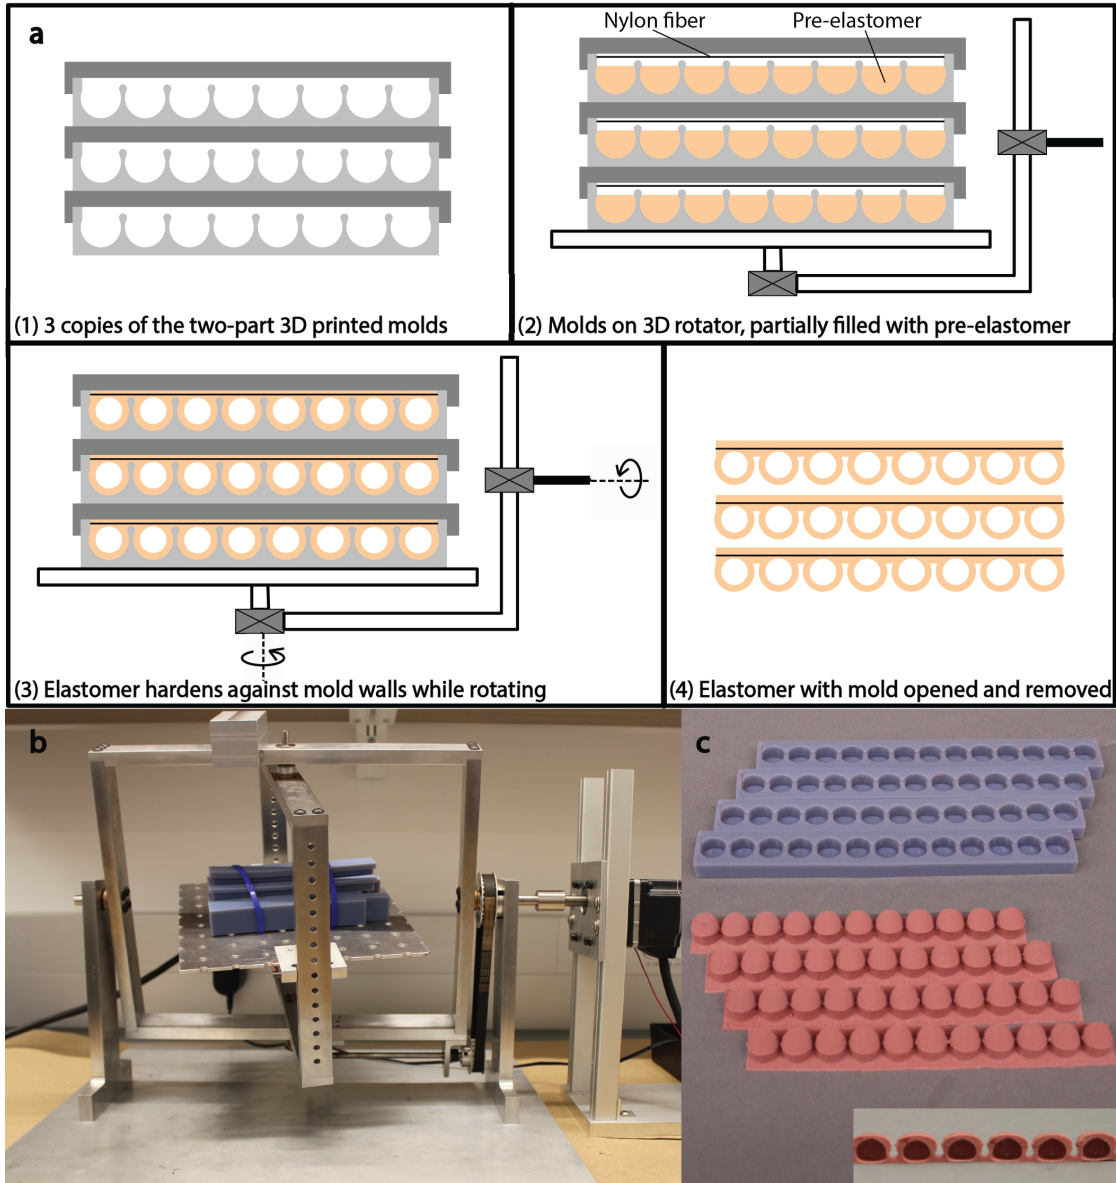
Rotational casting. (a) Casting process: 1) Molds; 2) Partially filled molds; 3) Rotational casting process; 4) Final elastomer structure. (b) Rotational casting machine with multiple molds affixed. (c) Molds used (top) and monolithic elastomers produced from those molds, with cross sections shown in the bottom right corner.
